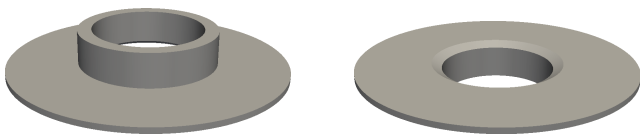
Detailed view of the connector disk's top and bottom side showing the chamfered edges.
